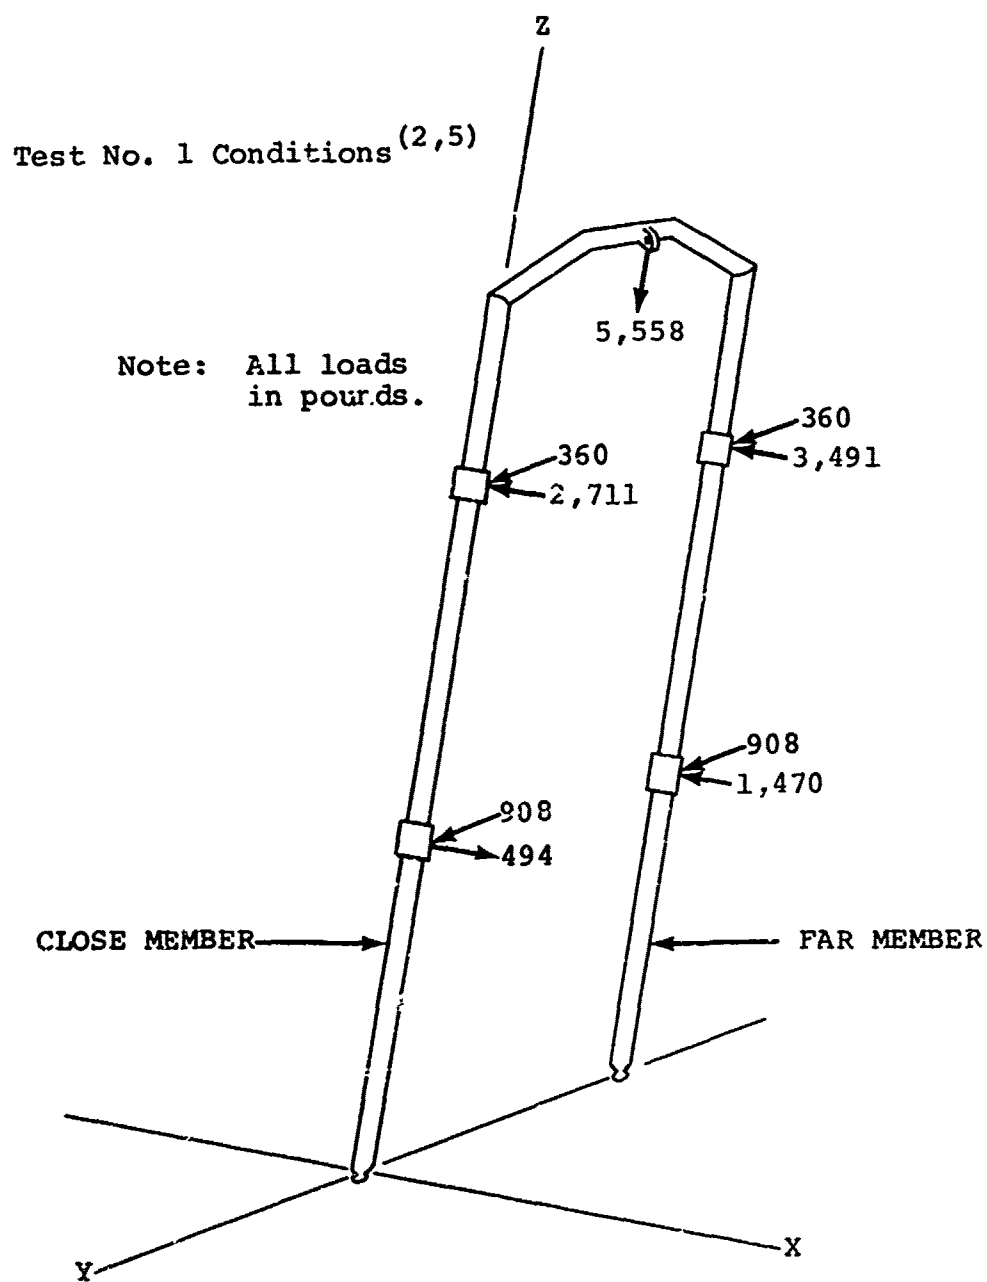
Applied Loading of Guide Frame Assembly - Triaxial Test.
